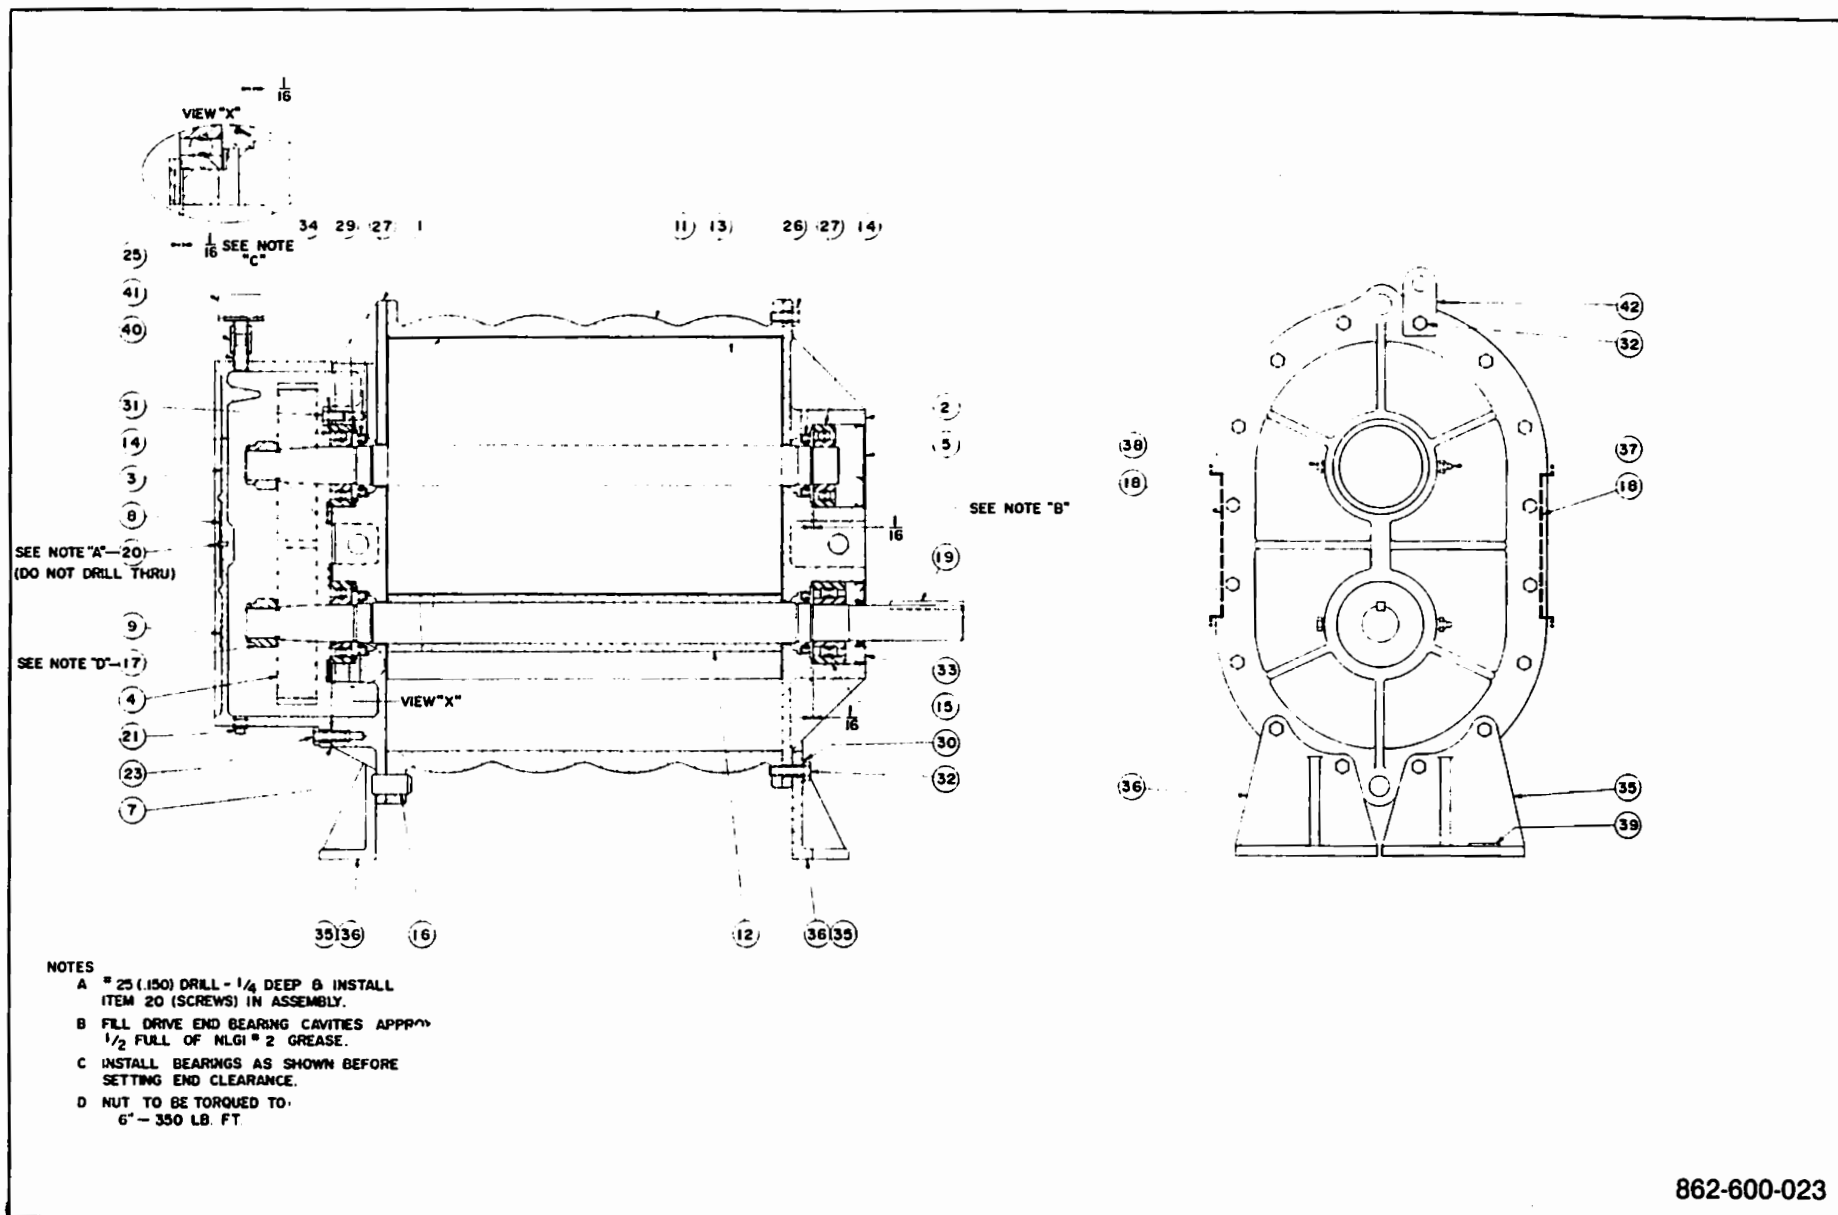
Assembly of RAI Blowers, 6" Gear Diameter
